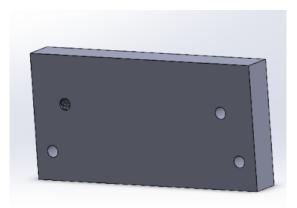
3D Model of the Spacer Block for the PM-727V.
